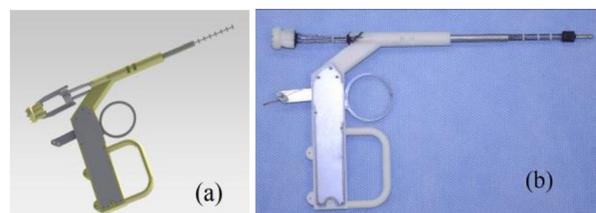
(a) CAD model of tool design, and (b) prototype of tool
